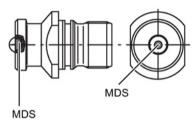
Installation example of MDS D421/D521/E623 in a stud bolt
